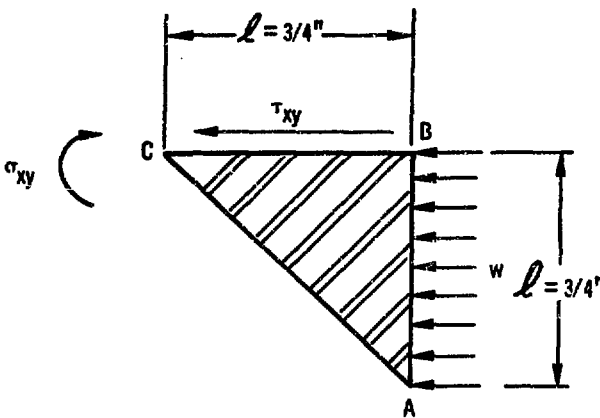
Free-body Diagram of Cross Section of Well-casing Fillet Weld
